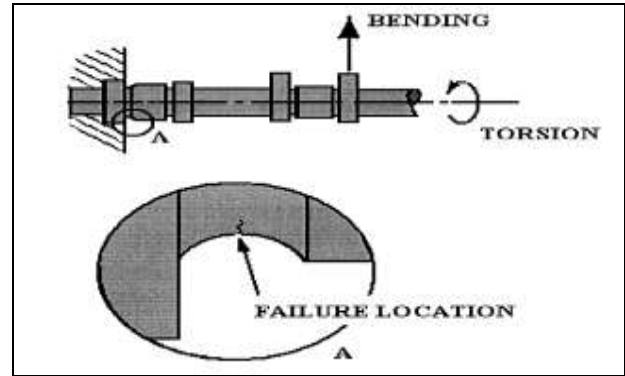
Camshaft component showing loading and detail of the notch which caused failure
